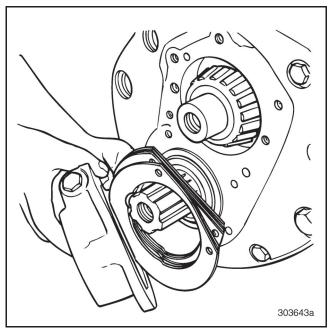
Removing Front-Driving Shaft Seal Housing and Adjusting Shims
